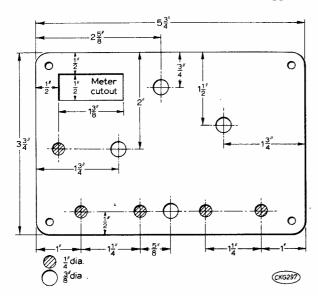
The front panel, which is supplied with the case, should be drilled and cut as shown.
